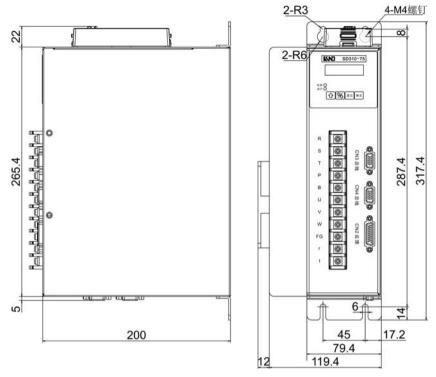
KND SD310/311-75/100 installation dimension (unit: mm)
